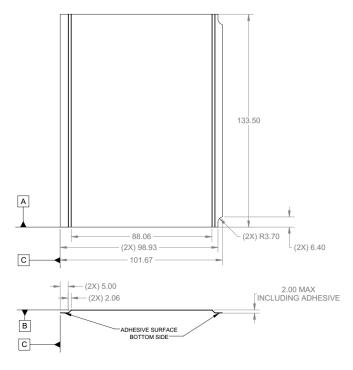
Large CardLFF Bottom Side Insulator (Top and Side View)
